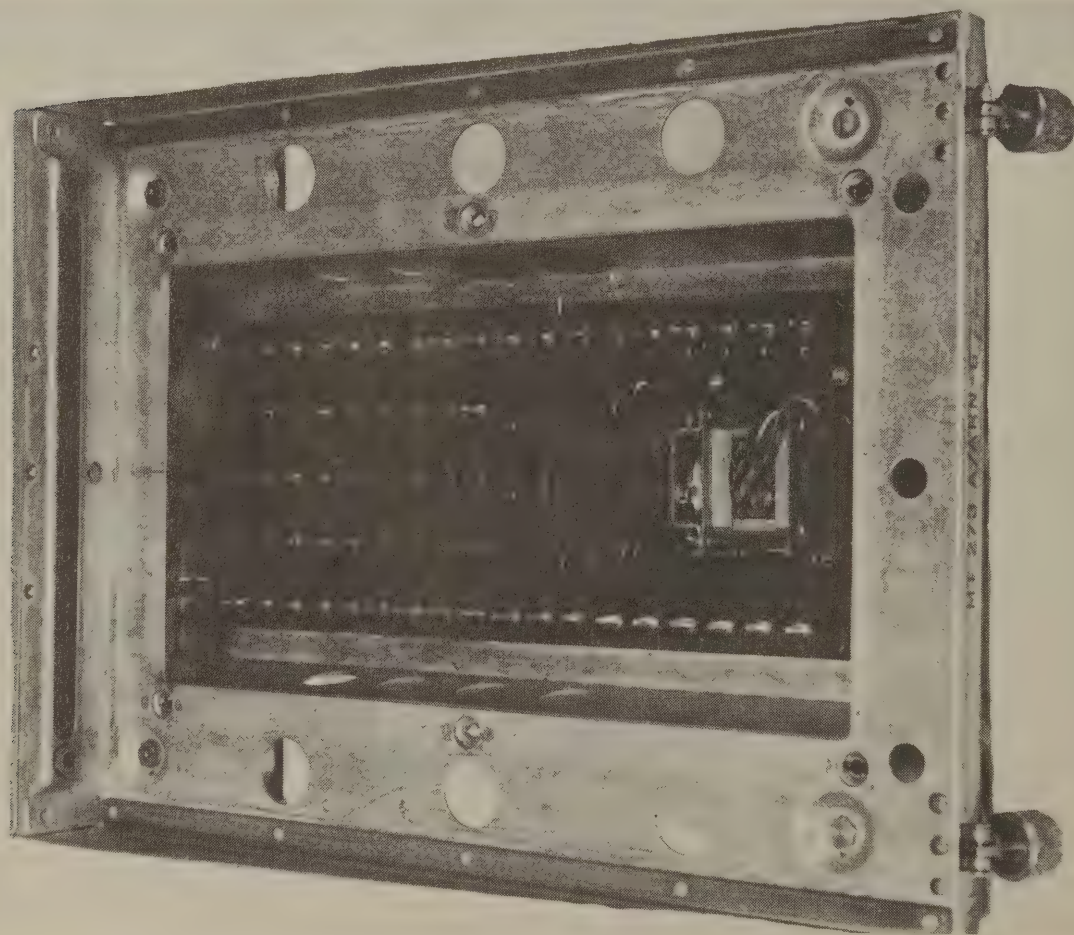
Mounting MT-273A/ARN-6, Cover Plate Removed.
